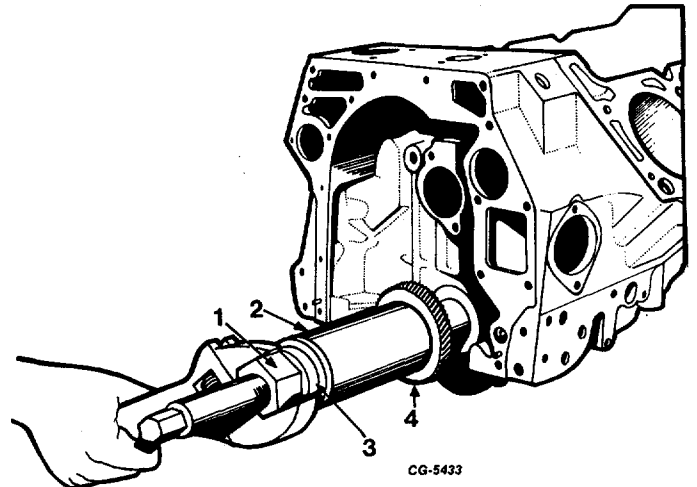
Installing Crankshaft Gear with SE-1900 Installer and SE-1900-18 Adapter
